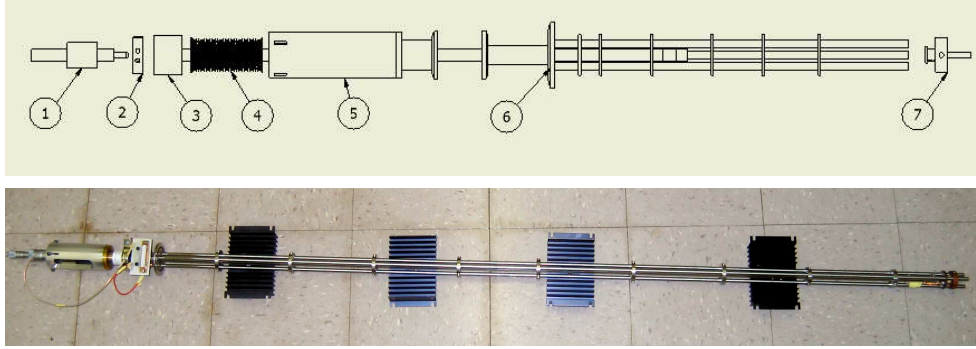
Differential micrometer PCARS probe: (Top) the illustration of probe design. Part(1) Differential micrometer; (2) Clamp collar; (3) Long tube with sub; (4) Compressive spring; (5) Spring Cavity; (6) Probe frame; (7) Sample stage. For clarity, it is not the real scale ratio for different parts. (Bottom) the picture of built probe.
